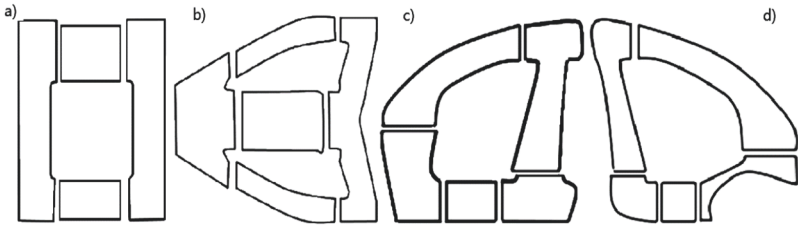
Typical laser welded blanks for body parts: a) Sun roof; b) Hood inner; c) & d) Door rings a) Sun roof; b) Hood inner; c) & d) Door rings
